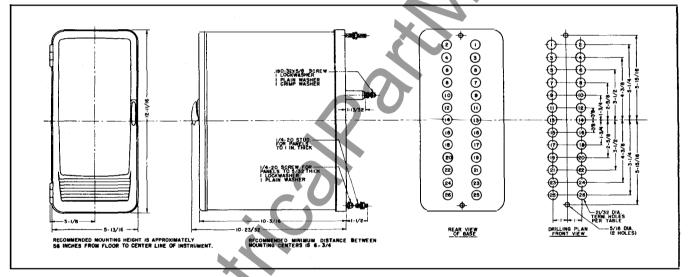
Outline Dimensions and Drilling Plan for Projection Type 44 Recording Instruments.
